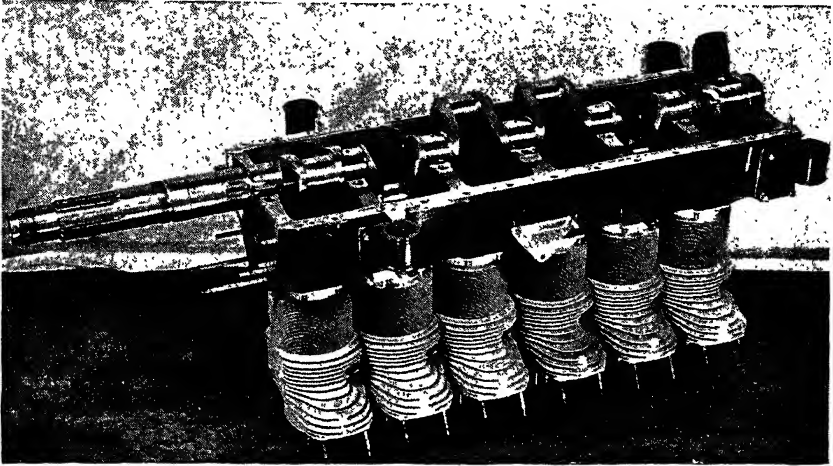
Crankcase and crankshaft of a six-cylinder in-line air-cooled aircraft engine. (*Ranger Aircraft Engines.*)
